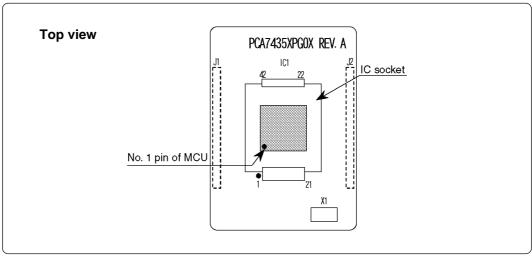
Mounting an MCU (PCA7435FPG02/PCA7435GPG03)
